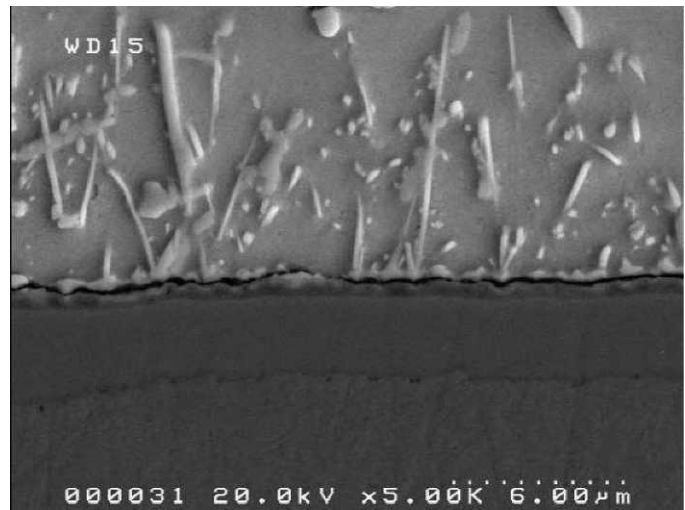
Board side failure of BGA with Orchid solder on ENEPIG finish (170°C T_g board).
